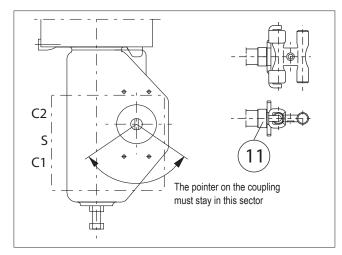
Mounting on Neles actuator with VDI/VDE mounting face
